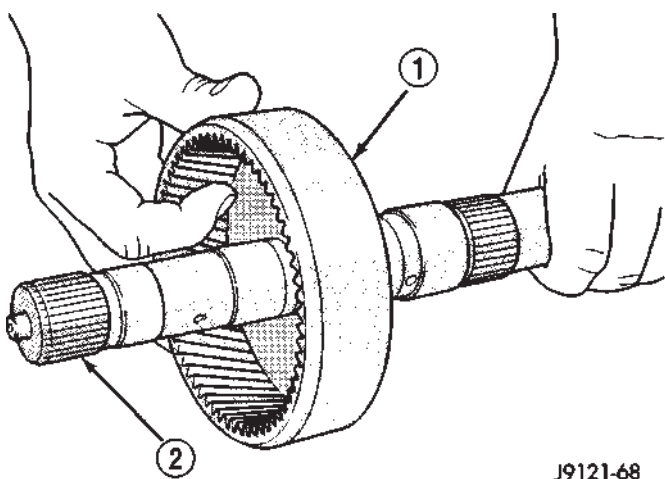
Installing Rear Annulus Gear On Intermediate Shaft J9121-68
